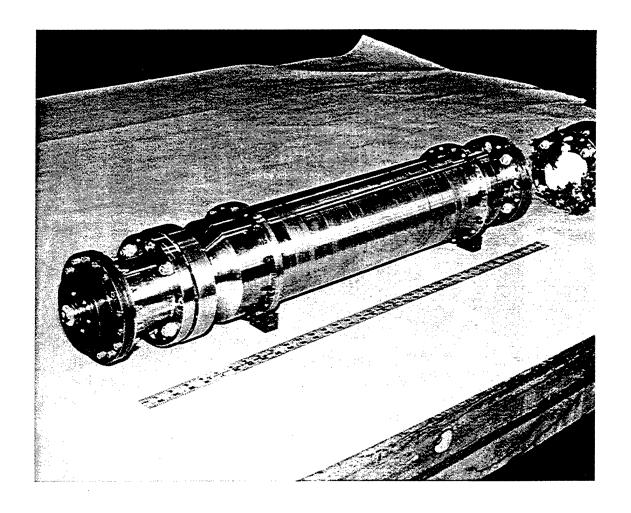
Photograph of driveshaft assembly pieces recovered from inner exit flow path.
